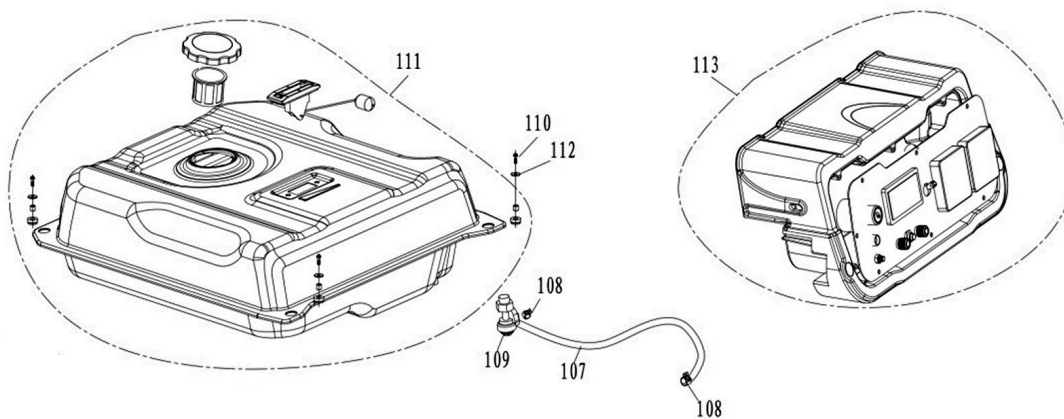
Spare parts drawing 2 and Spare parts drawing 2 PG-E 30 SRA
